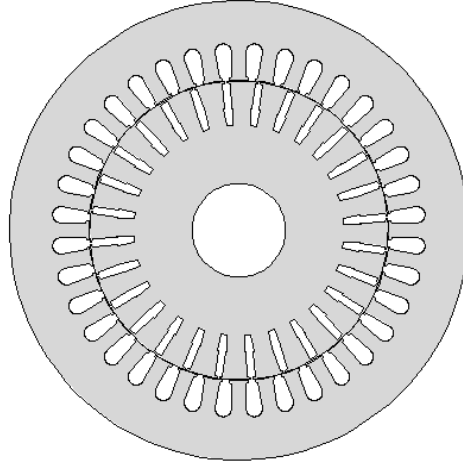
Stator and rotor laminations of an off-the-shelf 11 kW three-phase induction machine.
